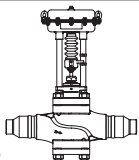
with butt weld ends Pressure balanced plug Spring opens on air failure
